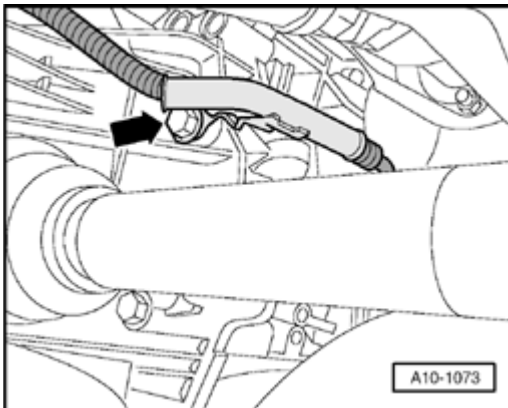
Guiding Tube For Positive Wire To Starter Is Attached Using Bolt Securing Engine To Transmission
